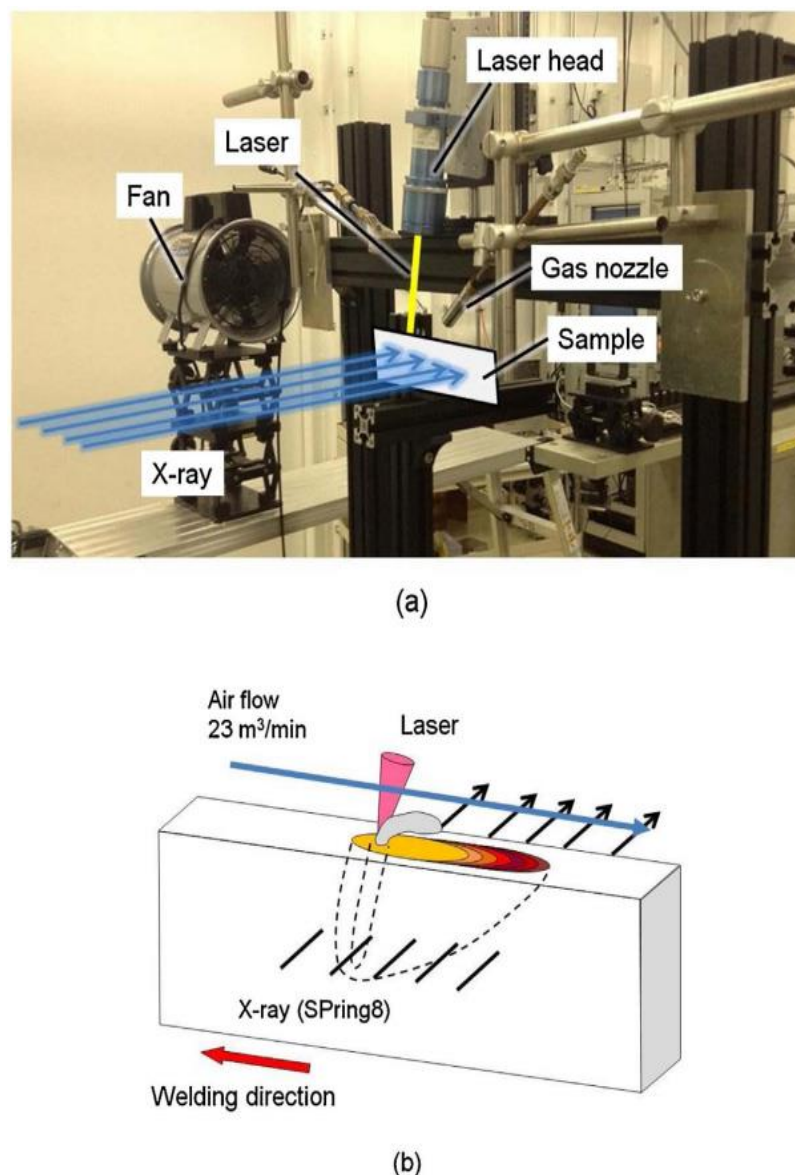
(a) Laser welding and X-ray observation setup at Spring-8 [1], and (b) schematic of laser welding.
